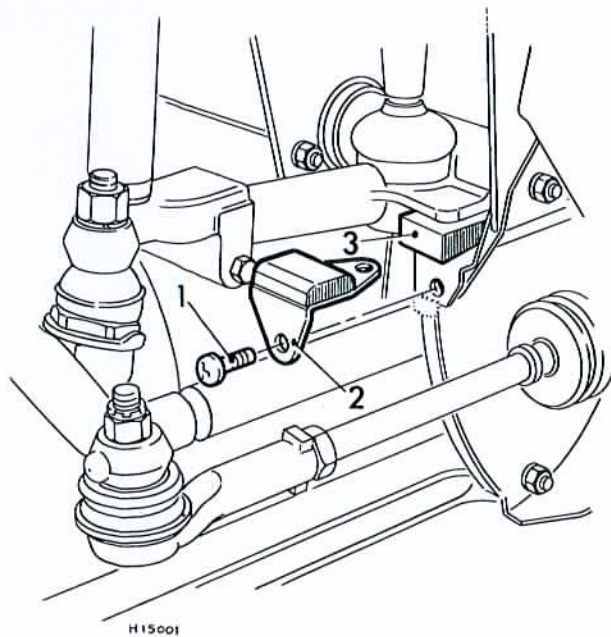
Fitting a solid packing wedge in place of the suspension rebound rubber (Sec 3)
